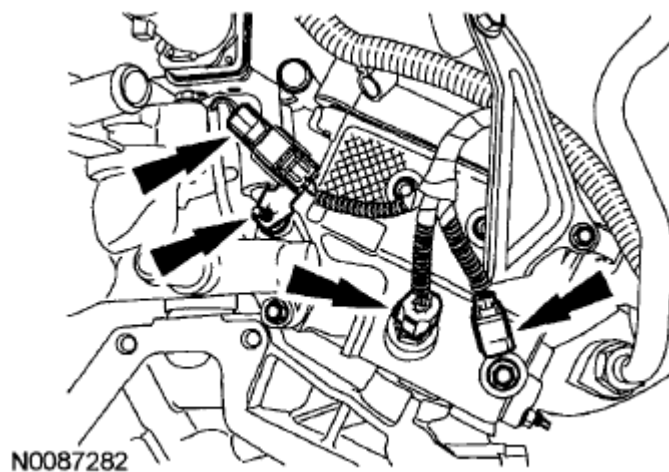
Locating Engine Block Knock Sensor (KS) Electrical Connector And Wire Harness Retainer
